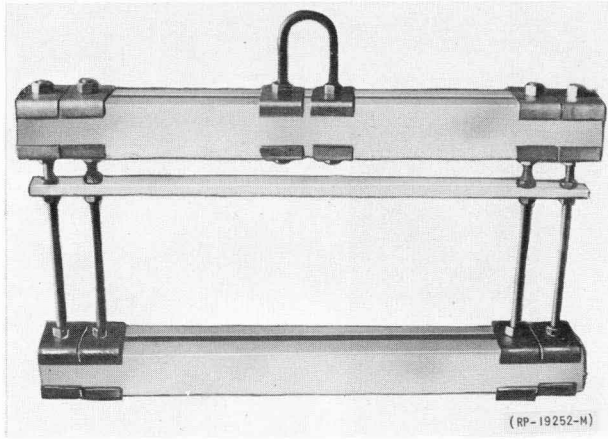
UNIVERSAL JOB MADE JIG (Para. 3.5)
